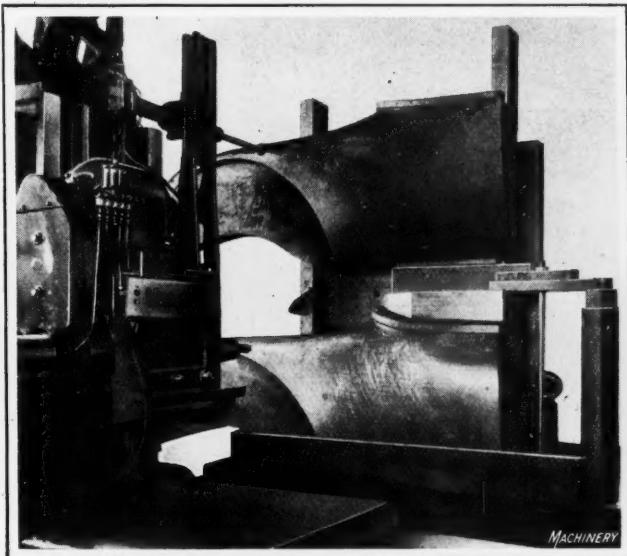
Machining a Large Die on an Automatic Die-sinking Machine
